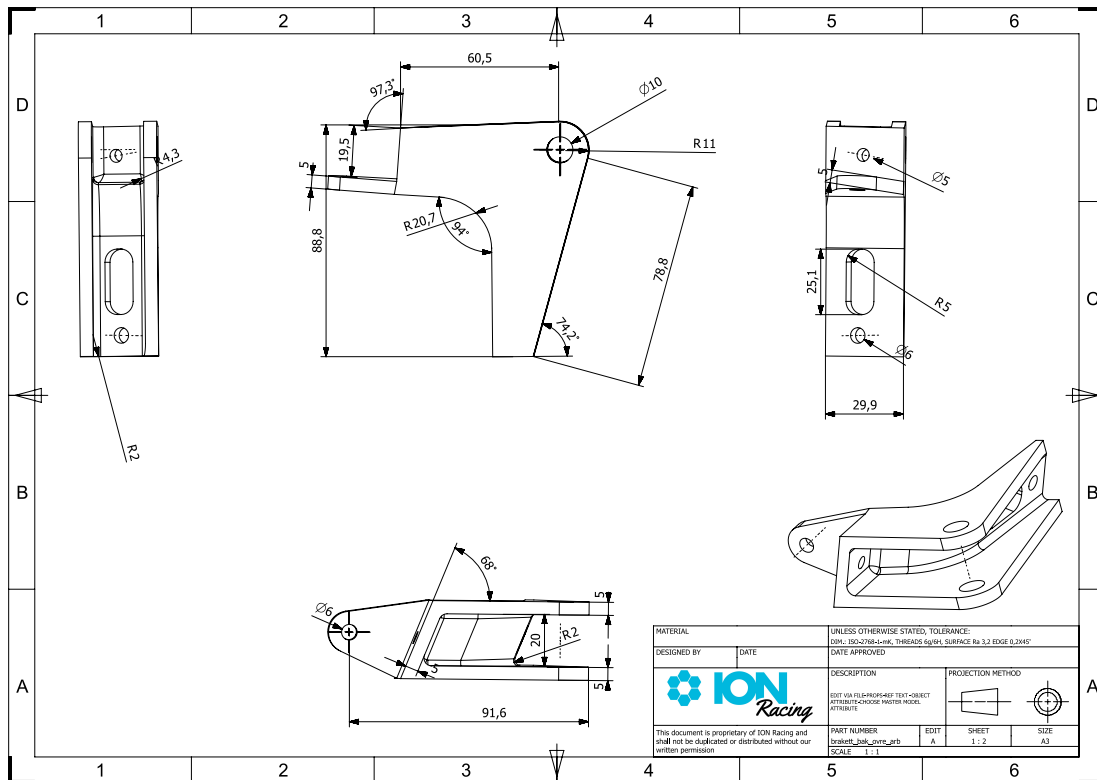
Engineering drawings of part IV: The metal race car rear suspension bracket[17]
